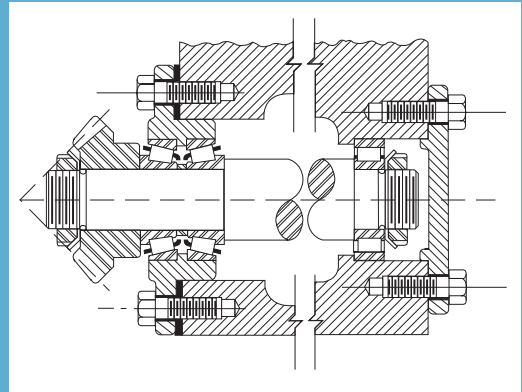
Arrangement recommended for long shafts to prevent temperature changes affecting position of gear mounted in oil-tight case.
